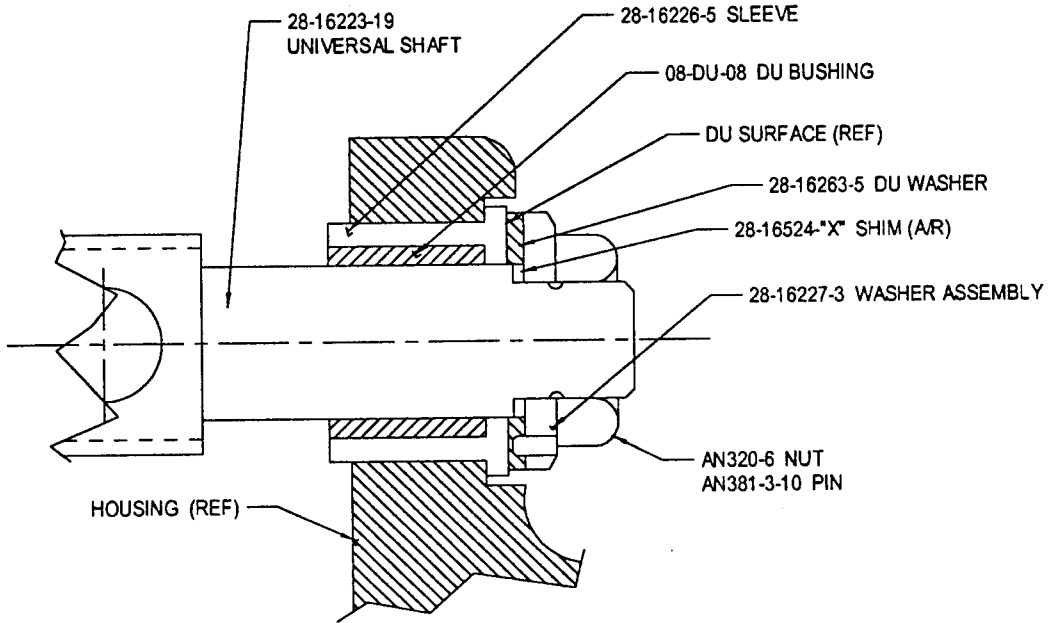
UNIVERSAL SHAFT TO LOWER HOUSING
